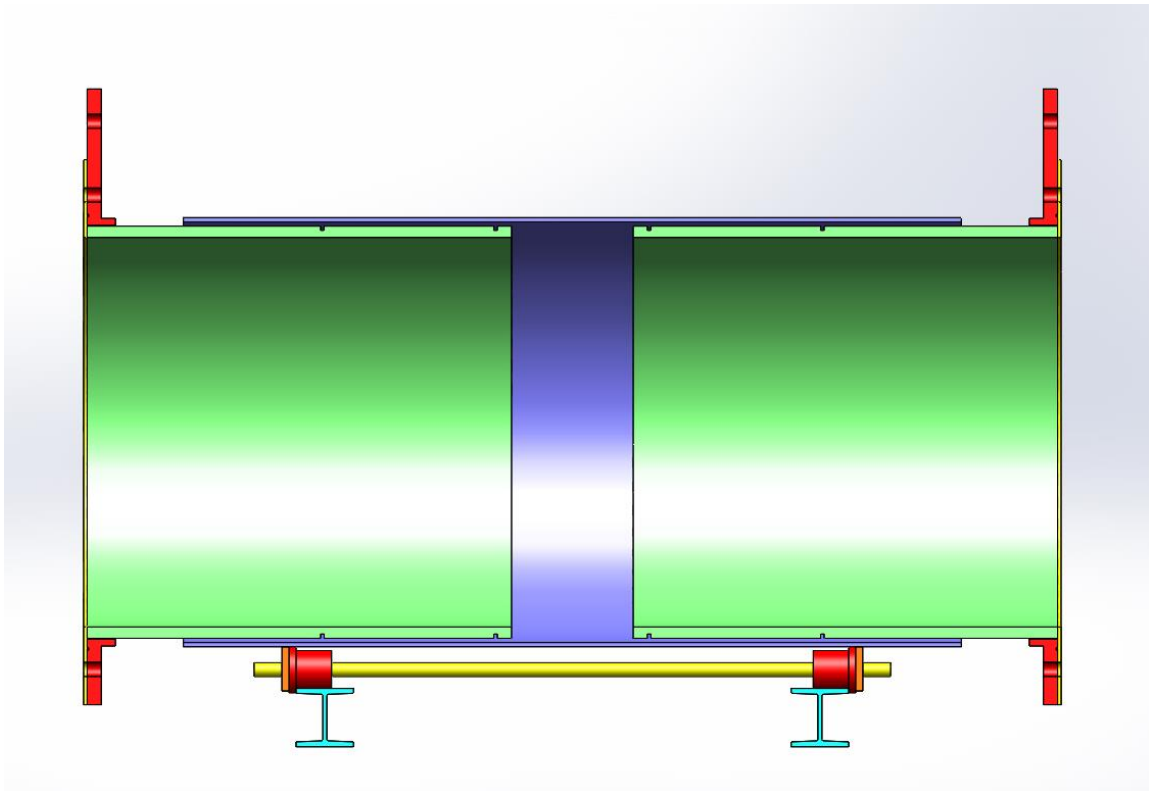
Section view of retracted inspection section, colored to show parts.
